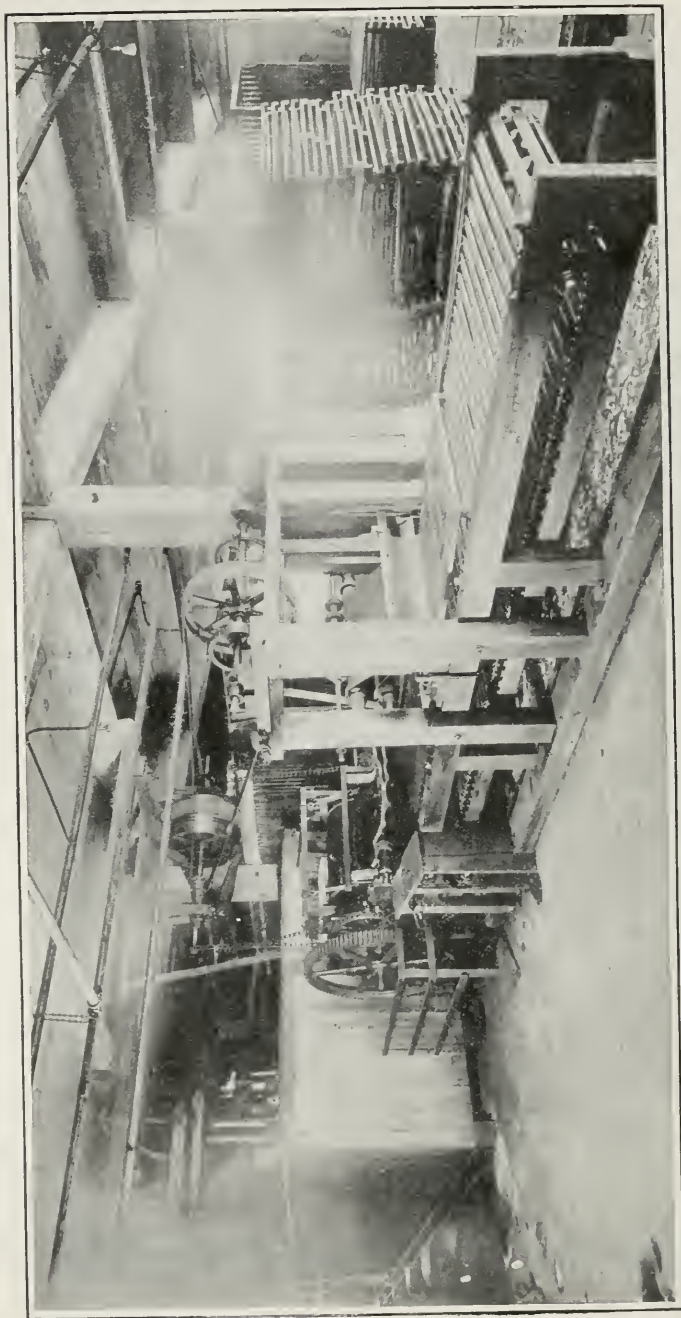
Chilling Roll and Spreading and Cutting Devices of Kind Machine
